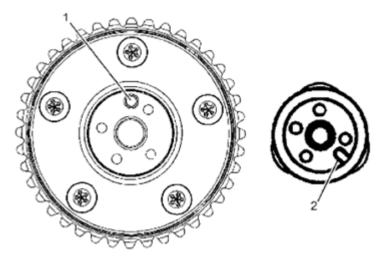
Aligning Lock Pin Of CMP Actuator With Groove Of Camshaft Courtesy of SUZUKI OF AMERICA CORP.
